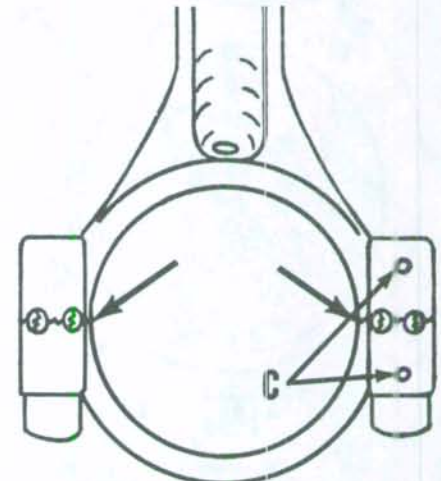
Uneven fractured parting line of rod and cap (shown at arrows) assures positive fit after assembly. Be sure correlation marks (C) are aligned.
